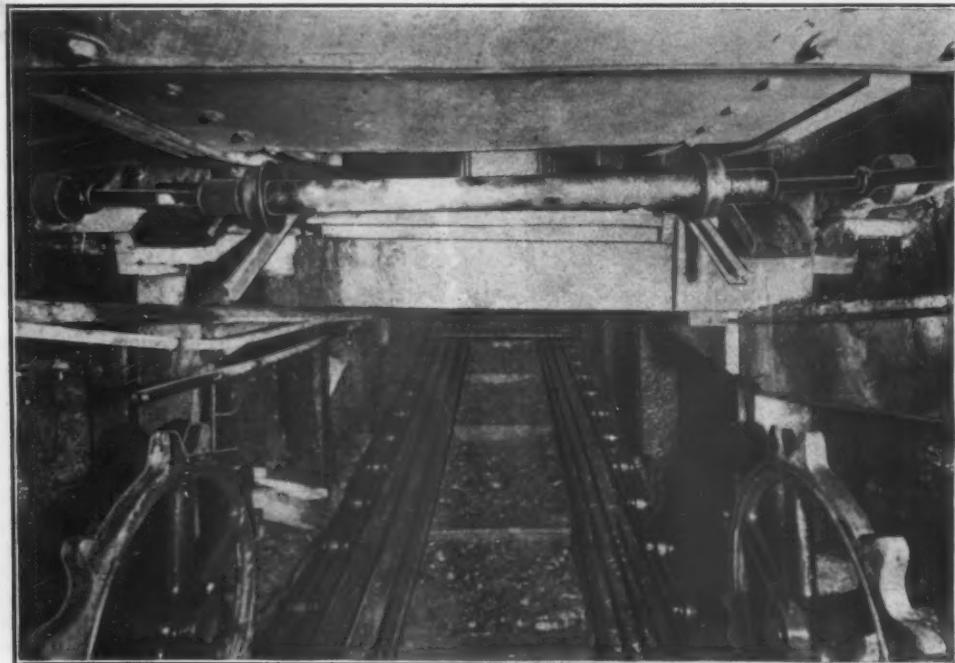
View Showing a Cross Bar Just Coming Through the Track Gate at the Bottom of the Upper Runway. The Sprocket Wheels Shown Are Idlers.
